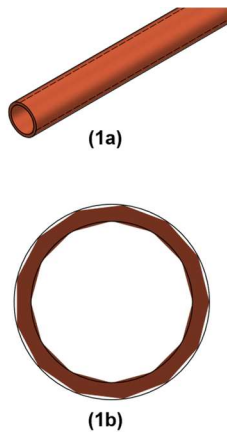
(a) Isometric view of the standard cylindrical tube, and (b) Cross-section of the same model.
